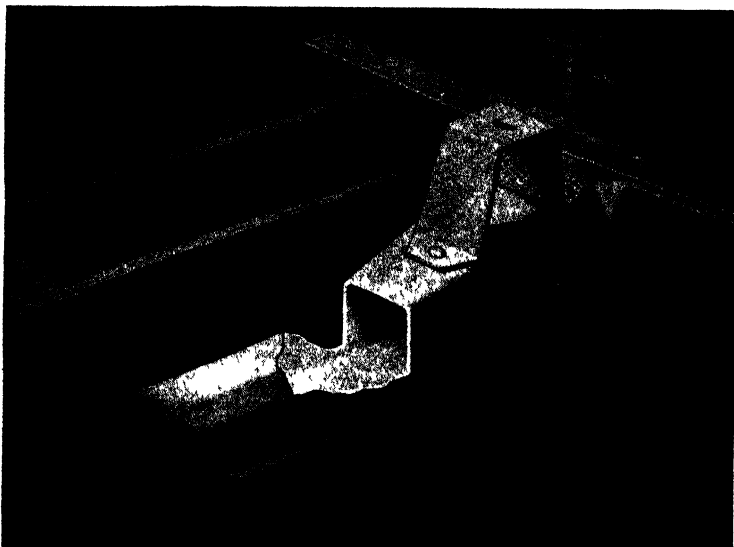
BOX-SECTION FRONT CROSS MEMBER WITH ENGINE-SUPPORT BRACKETS.
